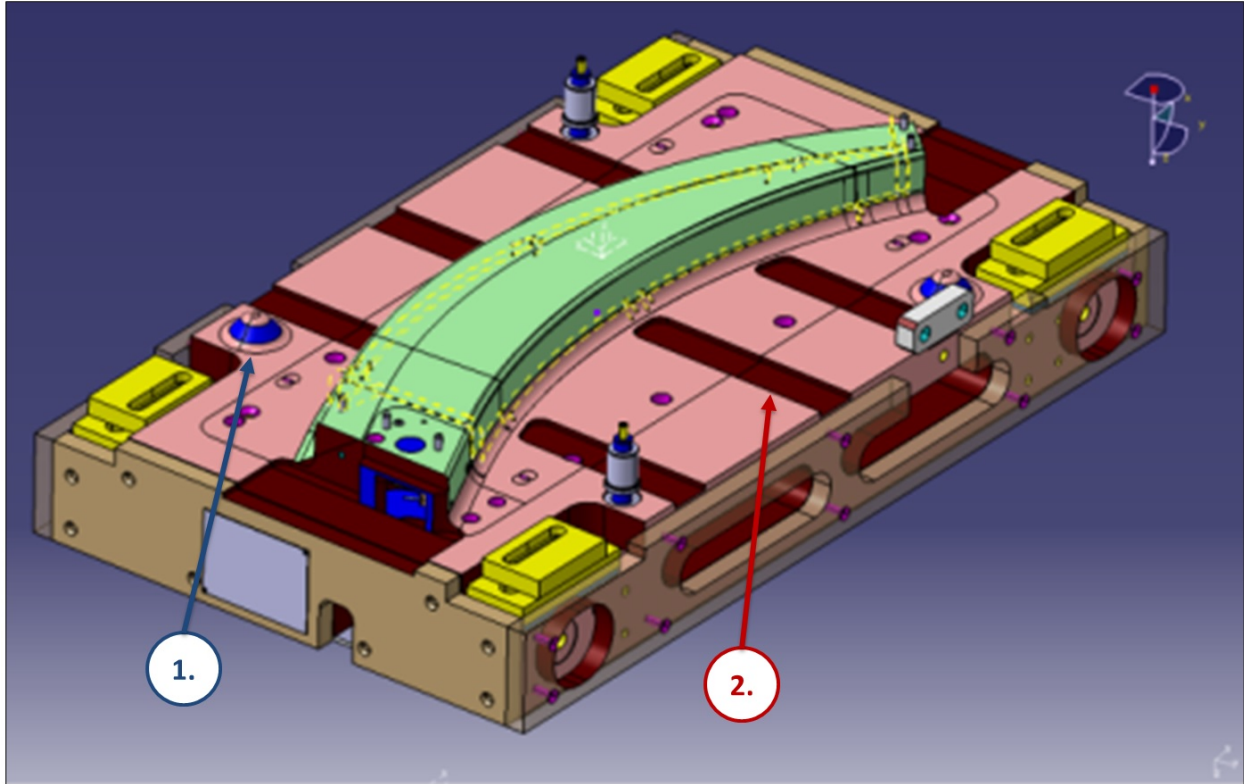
C-channel upper tool. The two guiding cones appear in blue (1.); 3 spring clamp pockets are machined on each long side of the cavity, and 1 pocket on each short side (2.)
